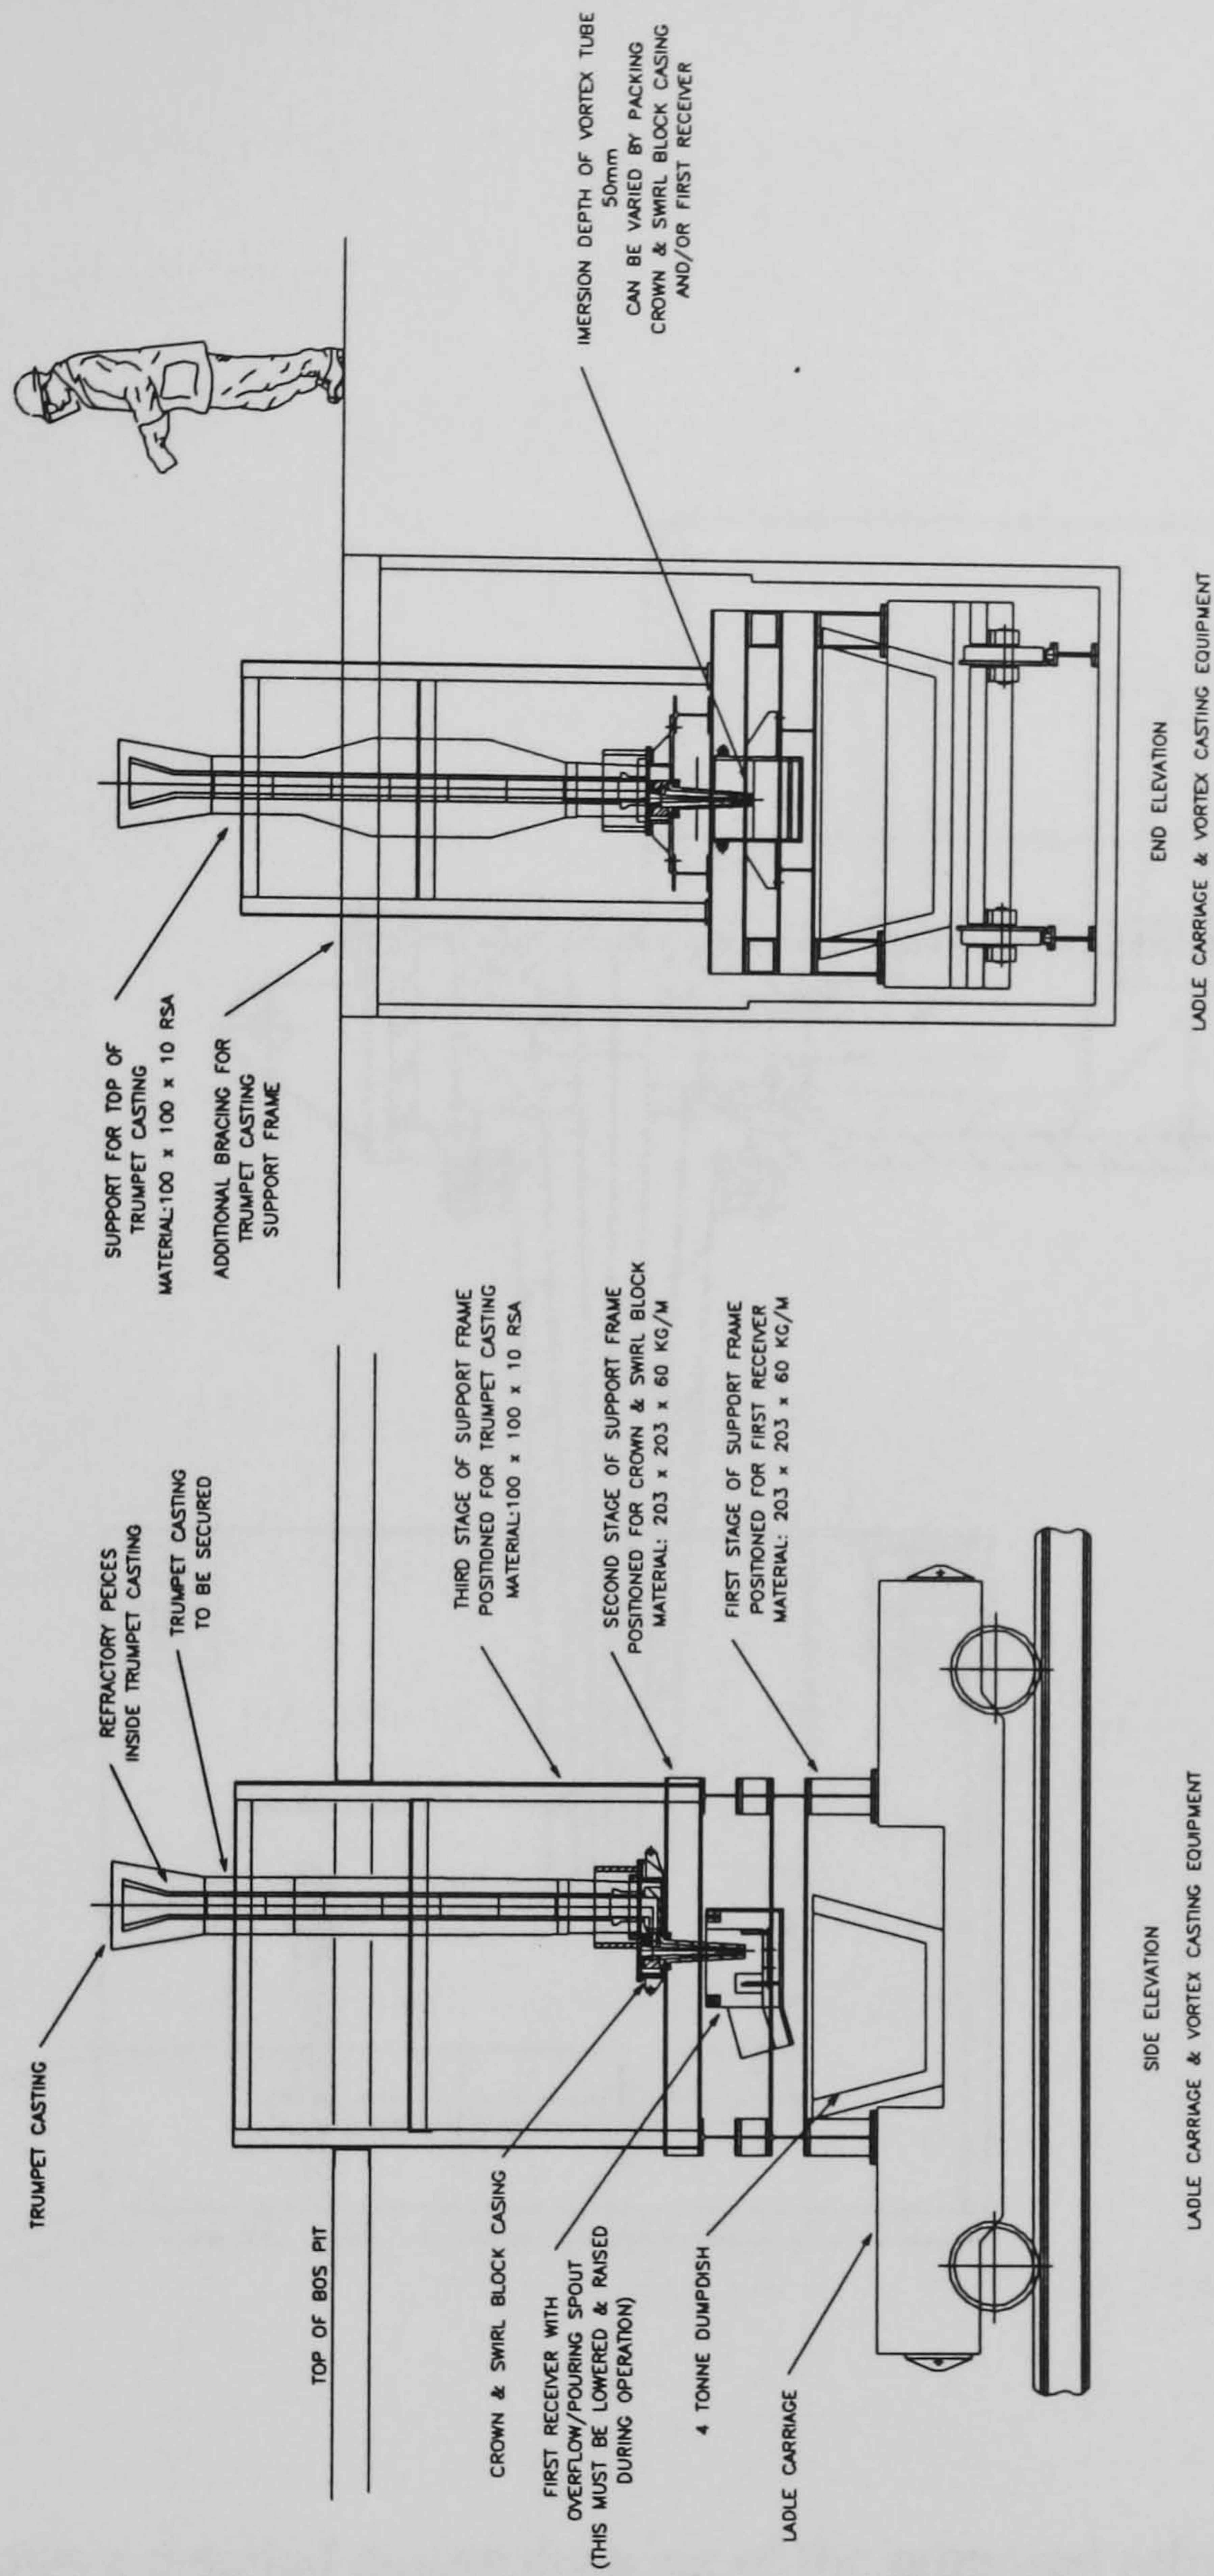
A scale drawing showing two elevations of the proposed cyclone vortex caster and supporting structure.
